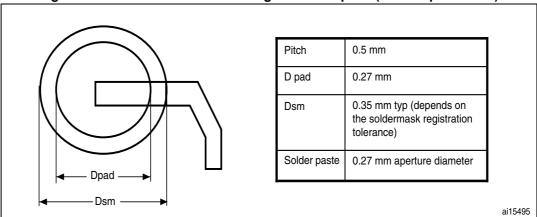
Recommended PCB design rules for pads (0.5 mm pitch BGA)
